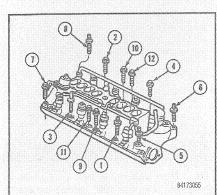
Lower intake manifold bolt torque sequence-5.0L engine
